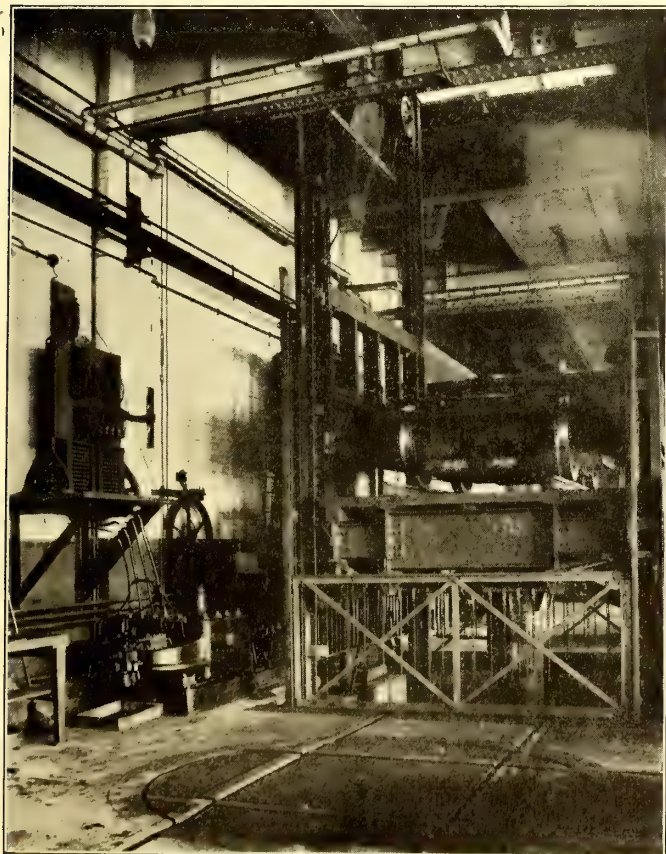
TRUCK ELEVATOR FROM REPAIR ROOM FLOOR, WITH TRUCK PART WAY DOWN
